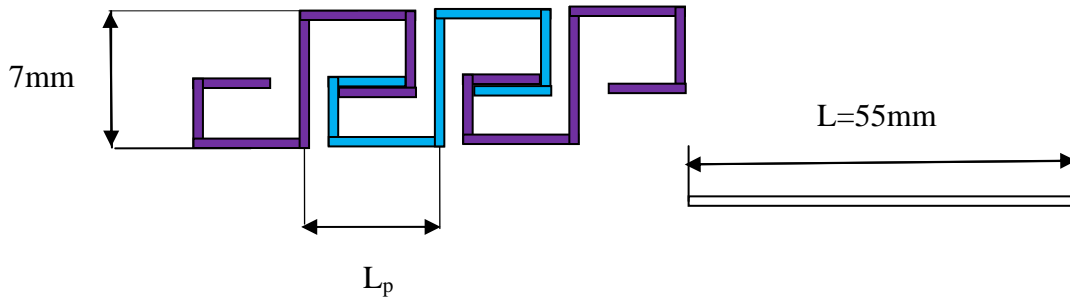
, Shape of carcass (made from a thin steel plate with dimension of 1.4*55 mm)
